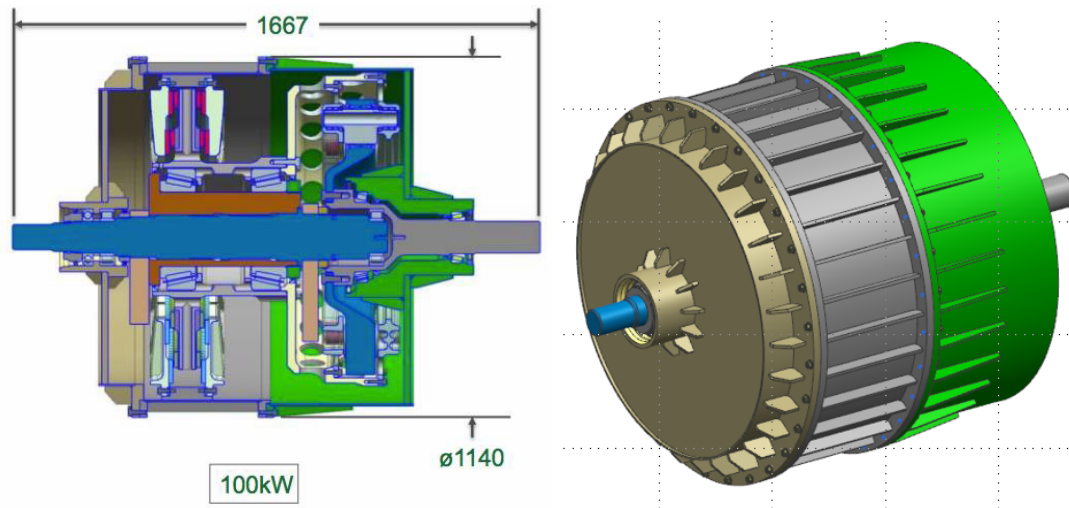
Schematics of Emrgy's 100 kW gearbox (dimensions in mm).
